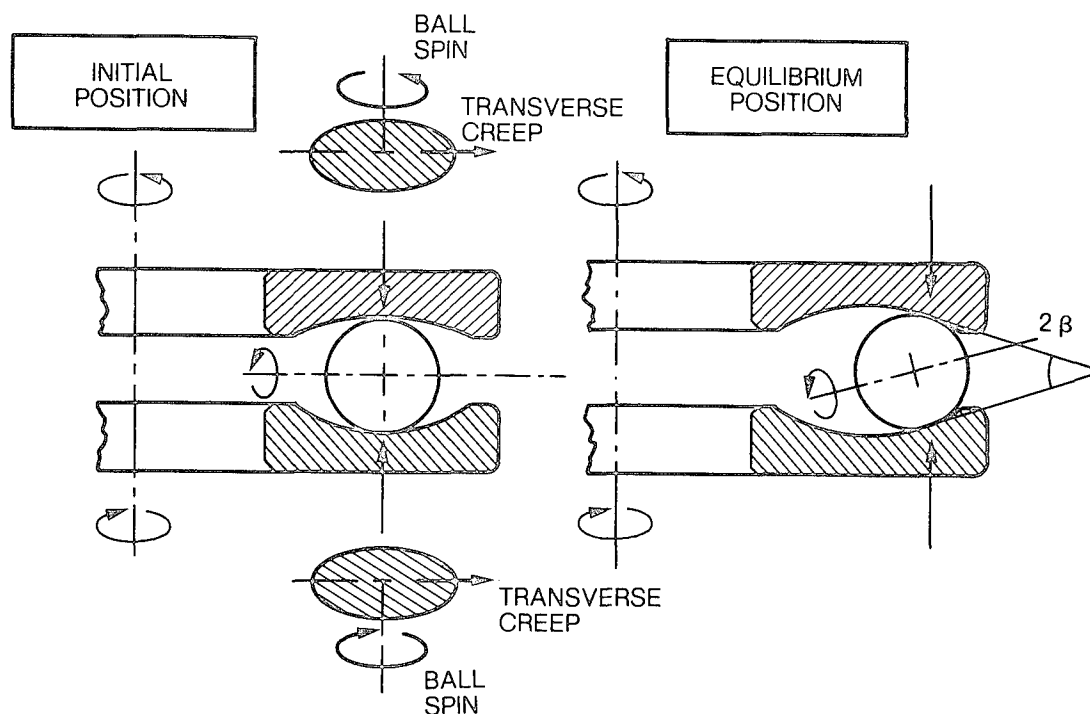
K.L. Johnson's Spin Experiment with Ball Thrust Bearing
